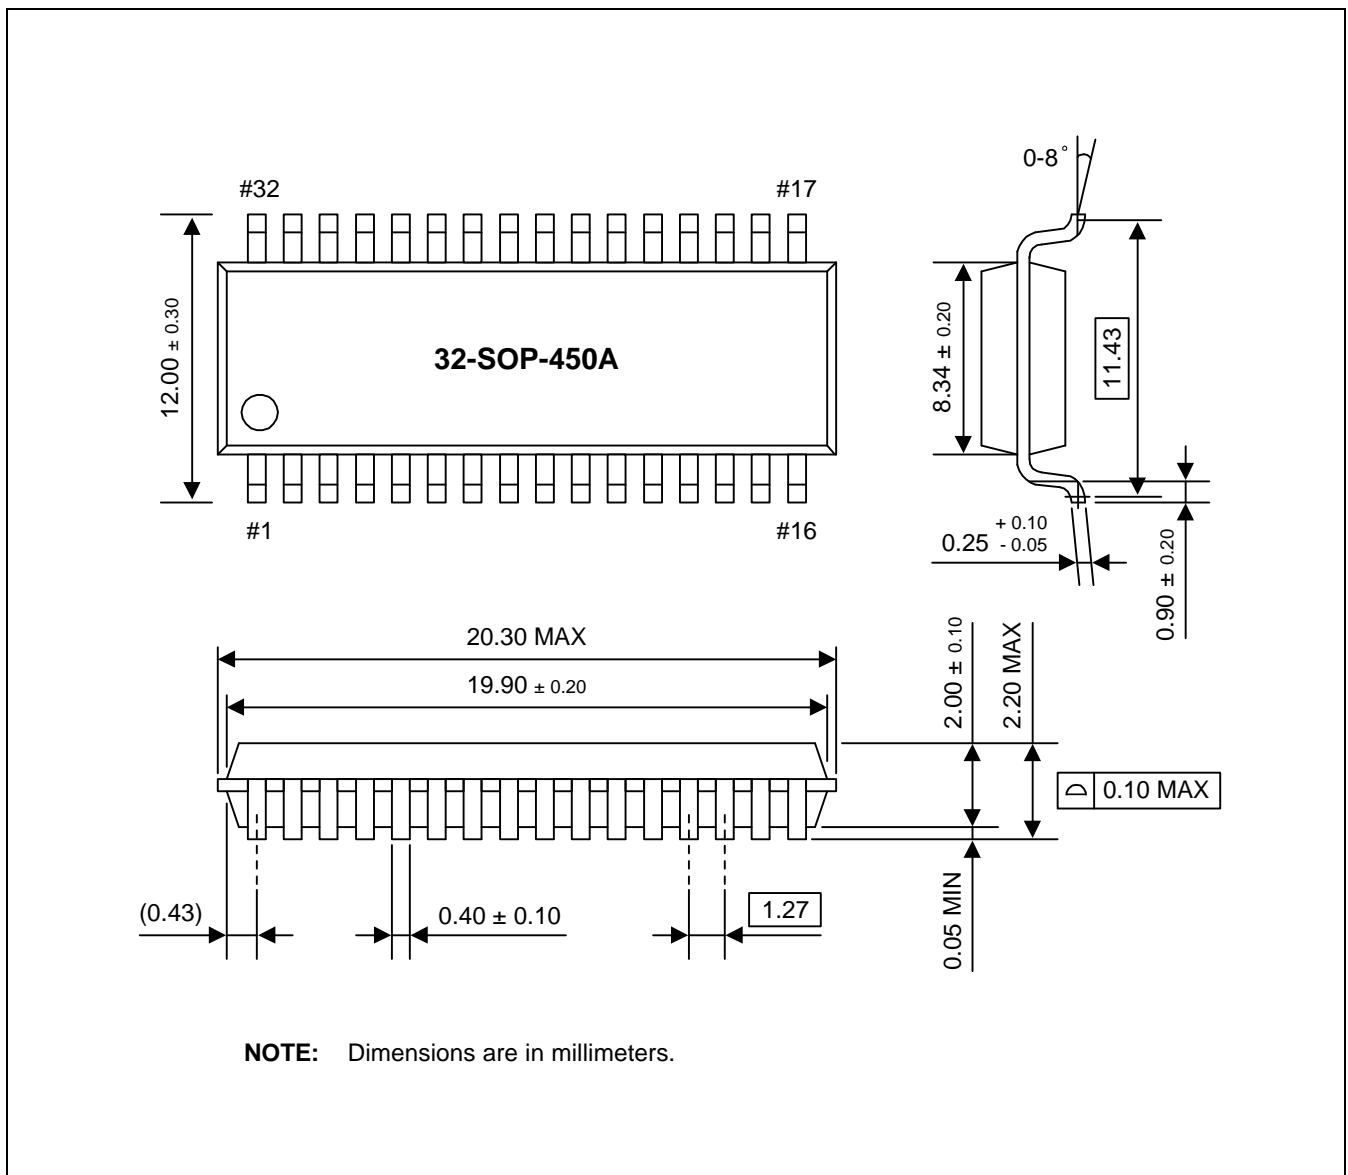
32-Pin SOP Package Dimensions (32-SOP-450A)
